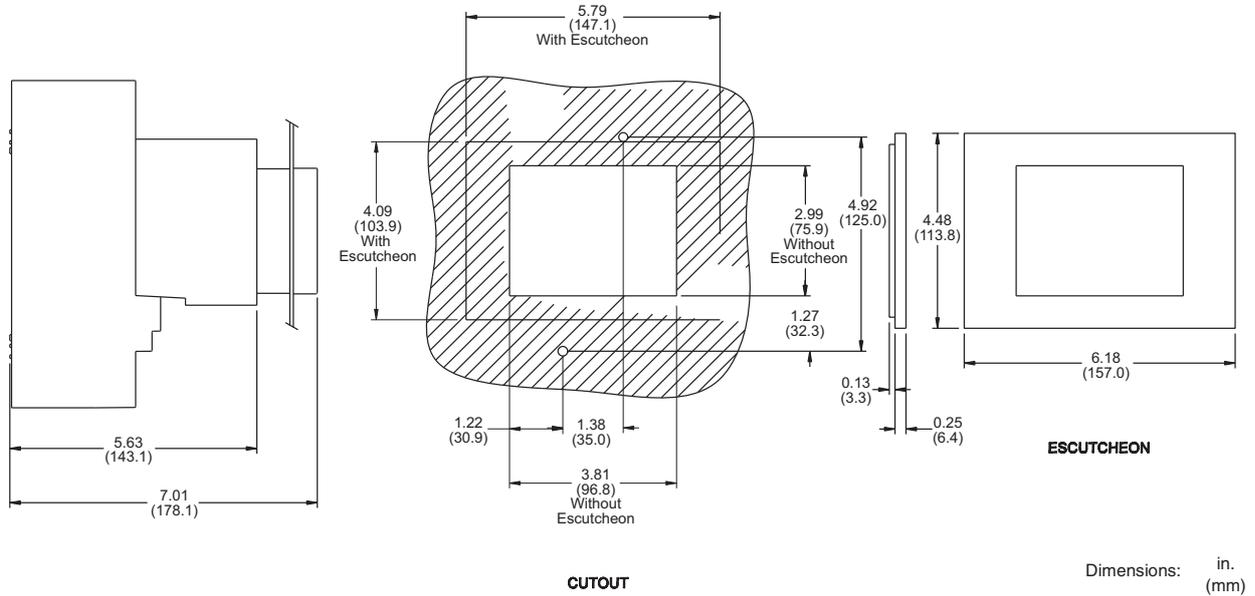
PowerPact H- and J-Frame Circuit Breaker Door Mounted Rotary Handle Cutout
